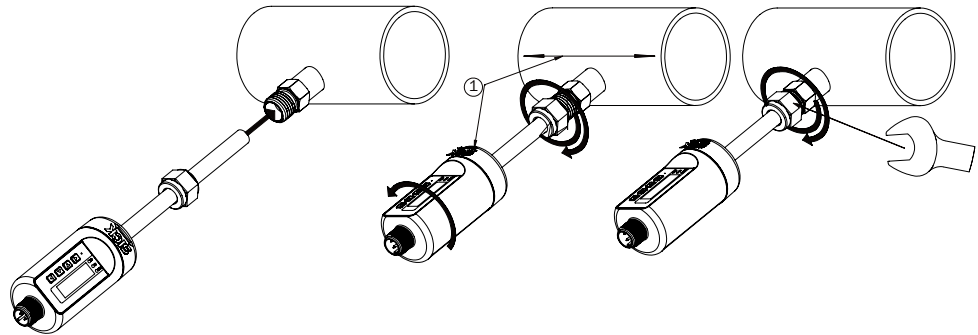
Mounting the T-Easic® with permanently pre-mounted clamping ring in a T-piece
